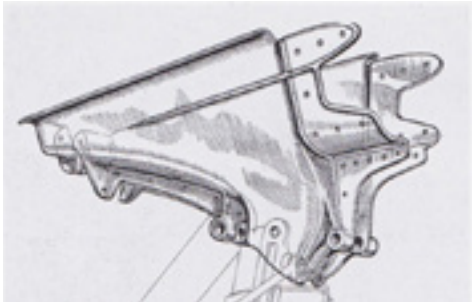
Drawing of cast aluminium component by Jean Prouvé
